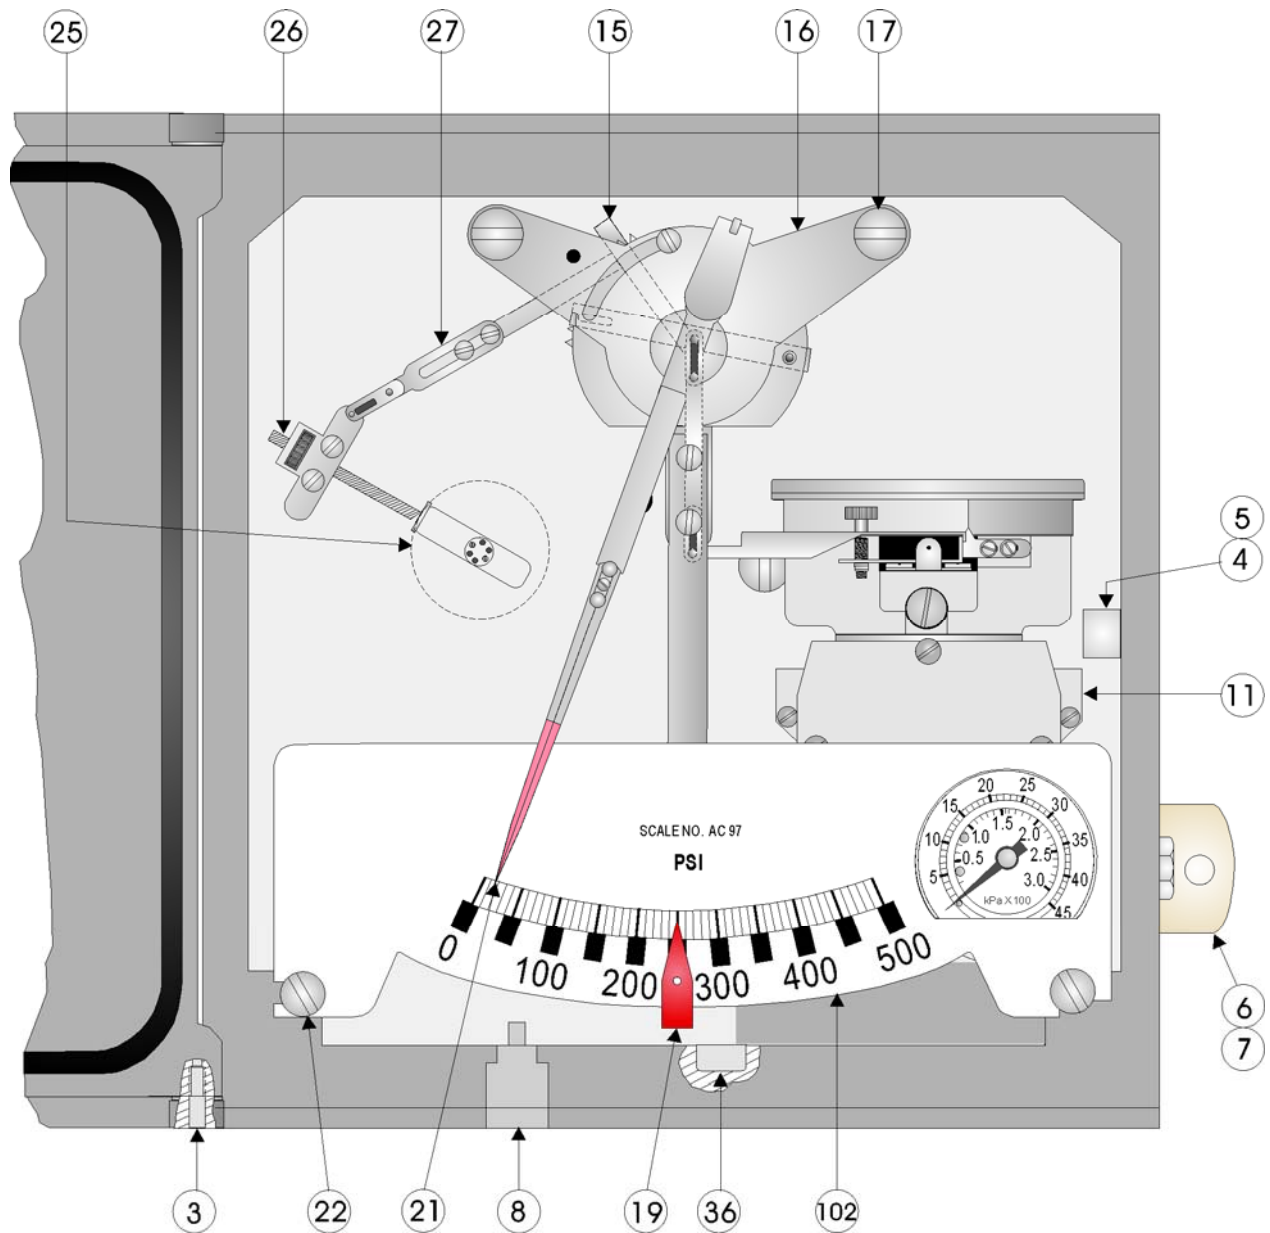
A - Basic Instrument Assembly (Measuring System Omitted)
